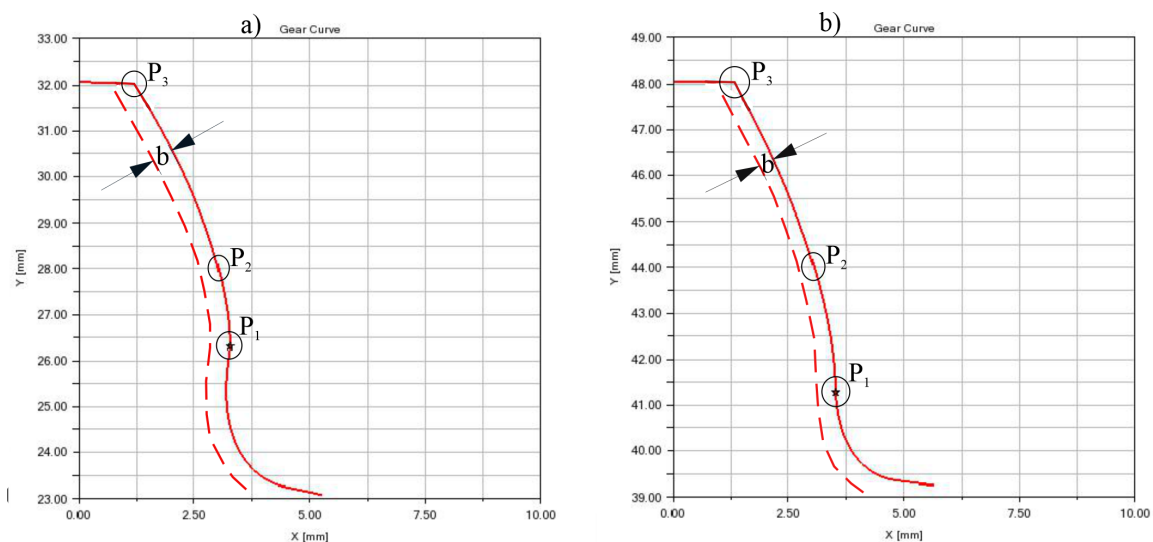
Tooth profile and contact points of (a) pinion and (b) gear.
